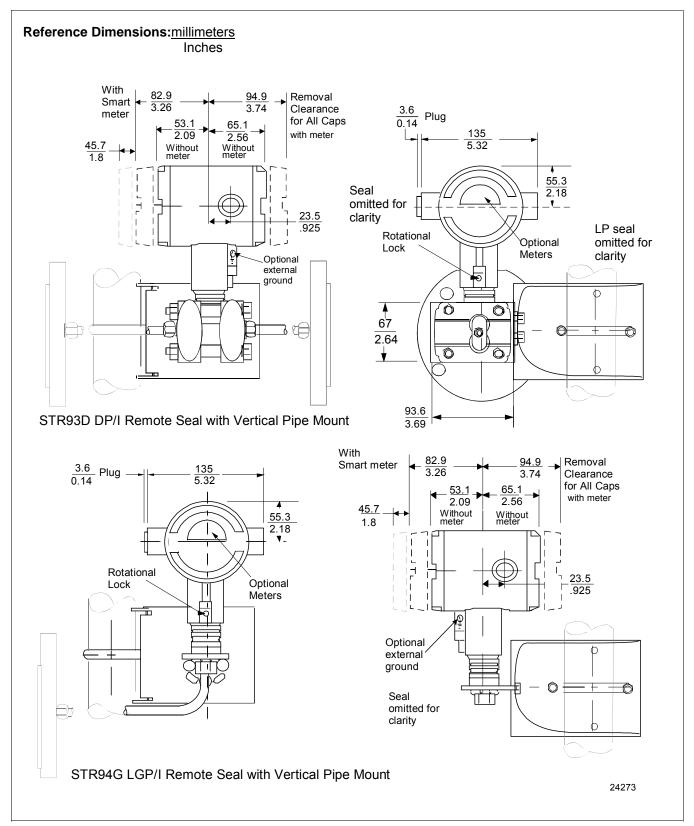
Approximate vertical mounting dimensions for Remote Seal Transmitter
